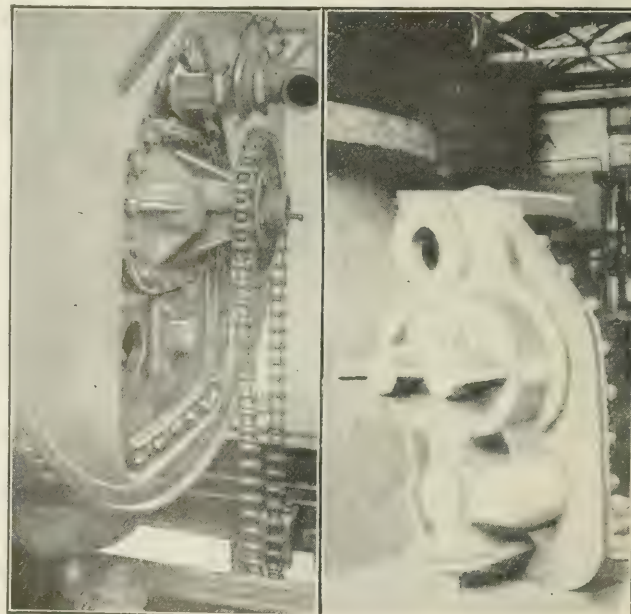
TRUCK PUMP IN PLACE AND REMOVED
